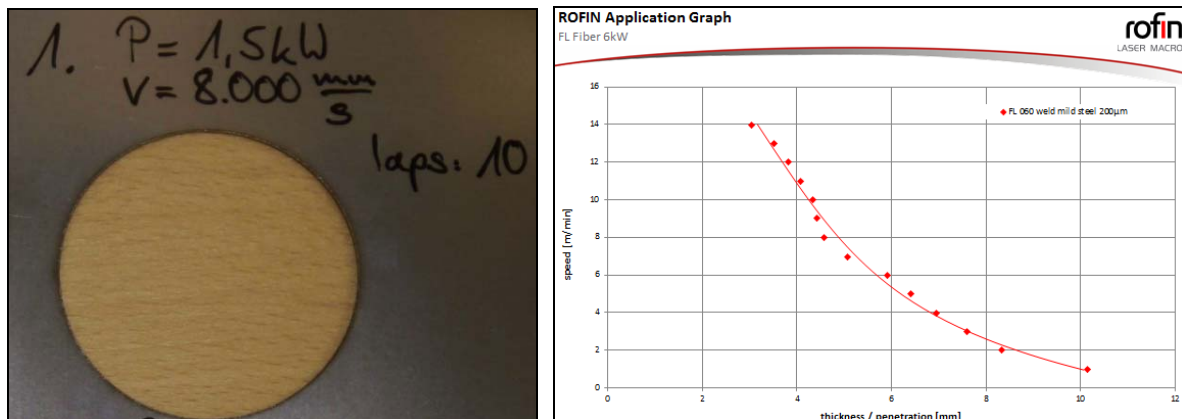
Remote cutting of stainless steel (left) and welding graph of mild steel with Rofin's 6 kW fibre laser (right)
